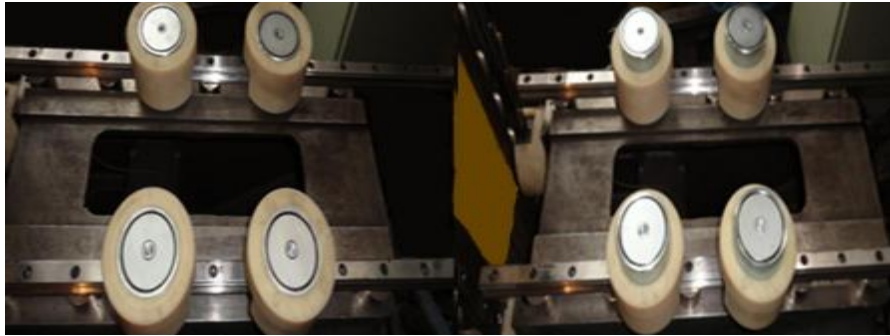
Assembly-disassembly oriented remanufacturing system, developed based on [11][15].
